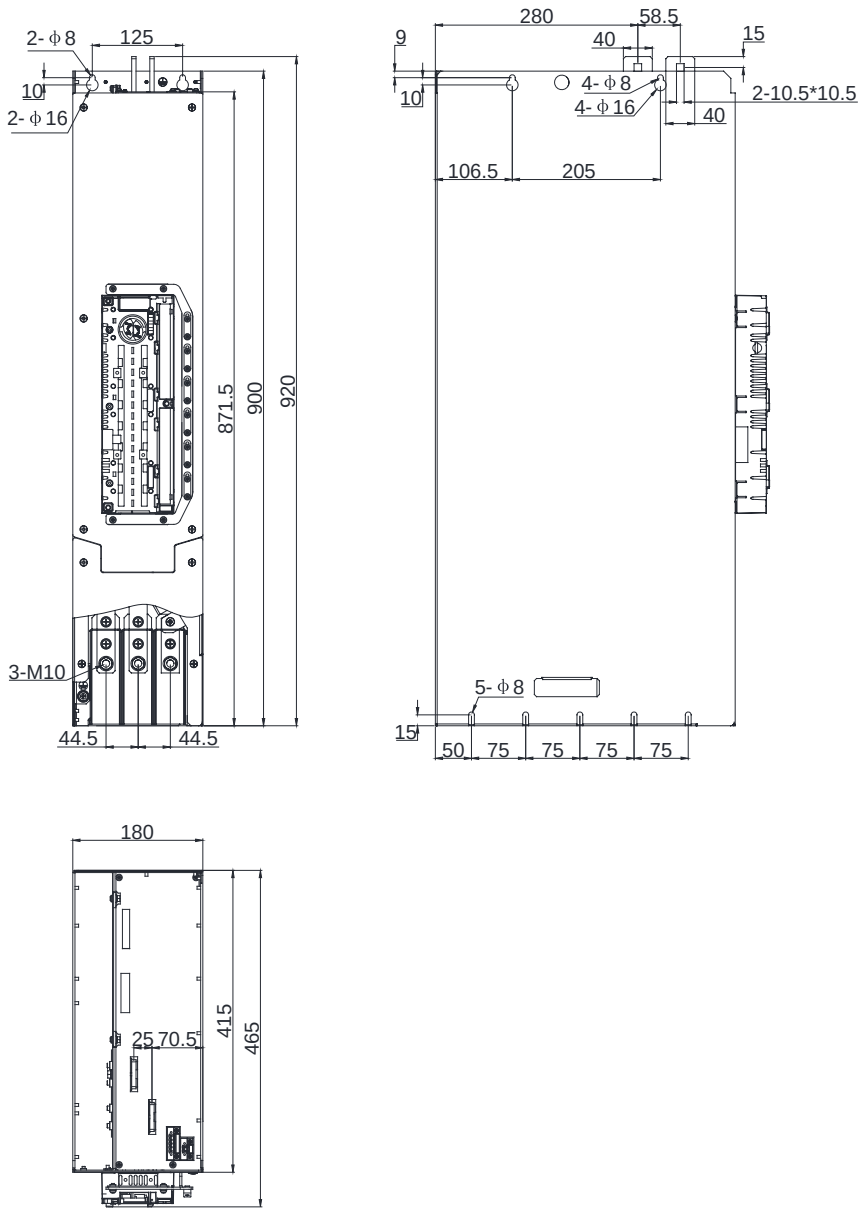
Dimensions of Size H7 Inverter (mm)
